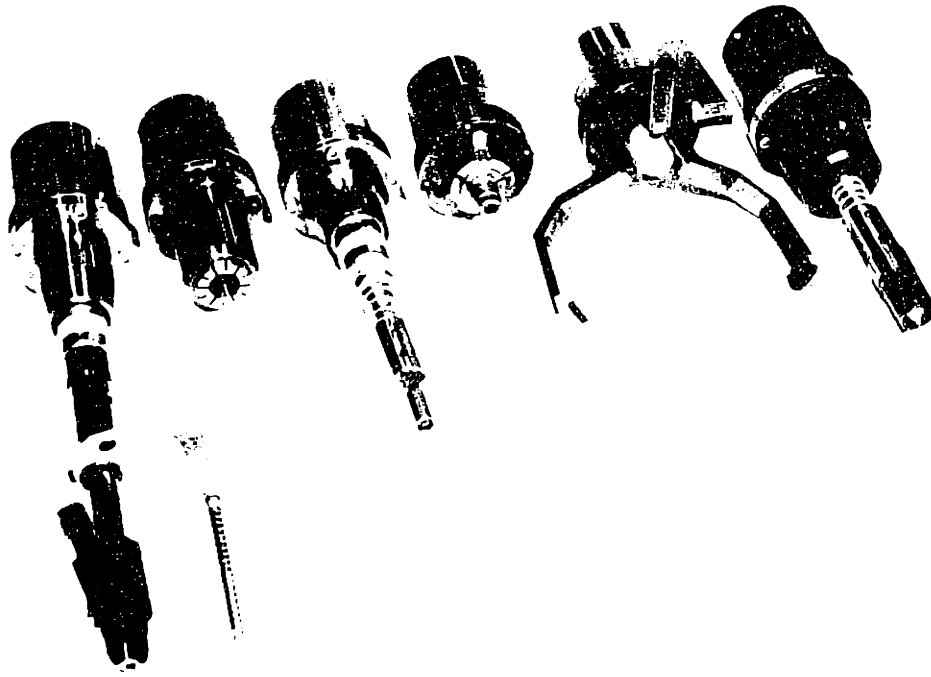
Tools used in the assembly of the automobile alternator. From left to right, screwdriver with automatic screw feed used to drive the short screws, contracting collet tool, screwdriver used to drive the long screws, expanding three-finger tool, large contracting three-finger tool, nutrunner used to torque the rotor onto the nut.
